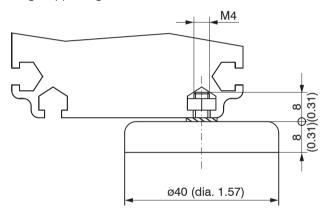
Magnetic holder MH2 - WDS, dimensions in mm (inches)
